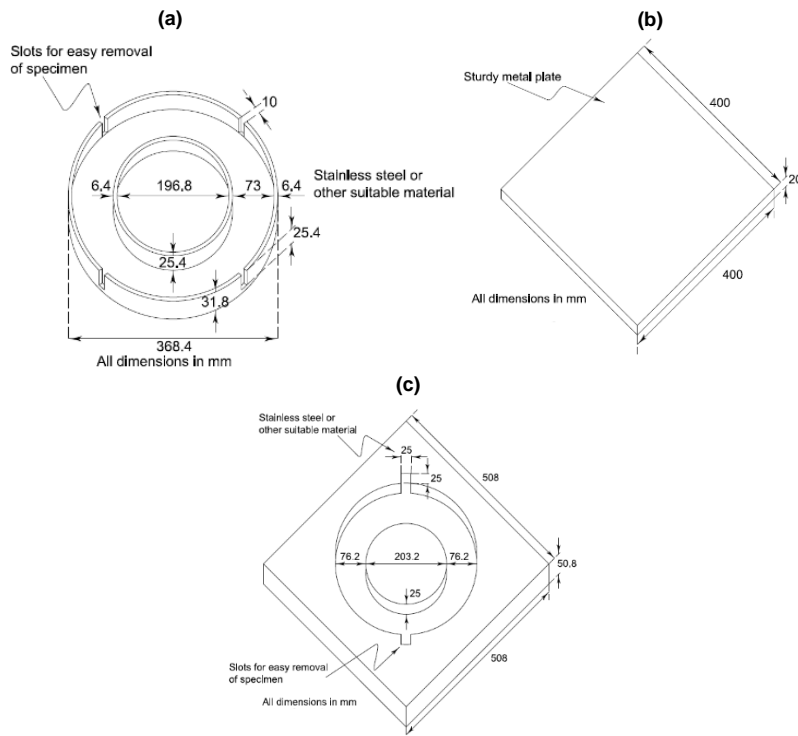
(a) Circular casting mold, (b) capping mold, and (c) square sample holder (49).
